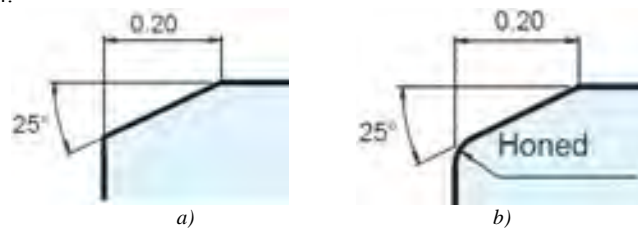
Type of edge preparations used in ceramic cutting tools: a) chamfered b) chamfered + honed
